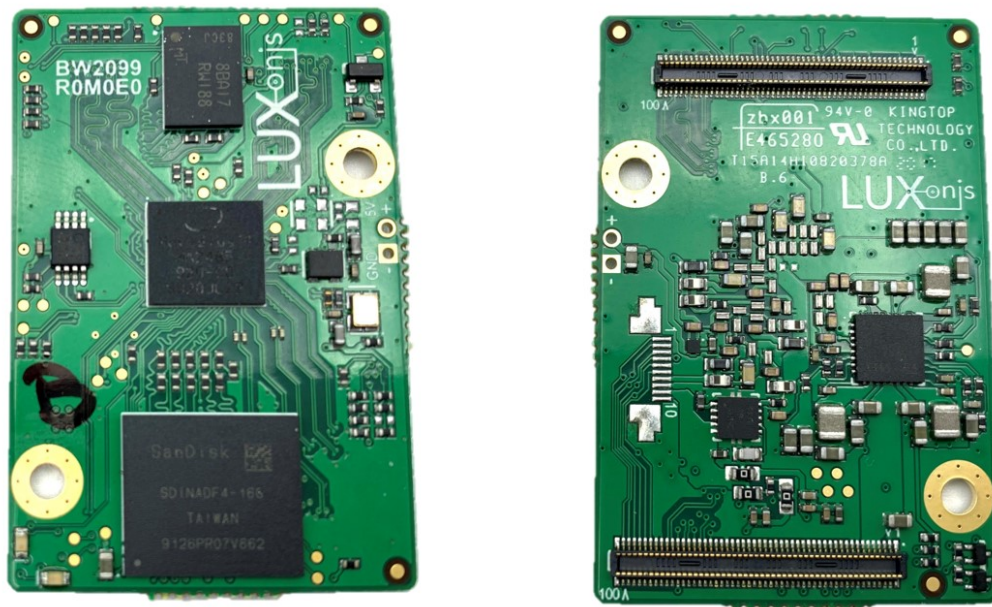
Top and Bottom of OAK-SOM-PRO PCBA
